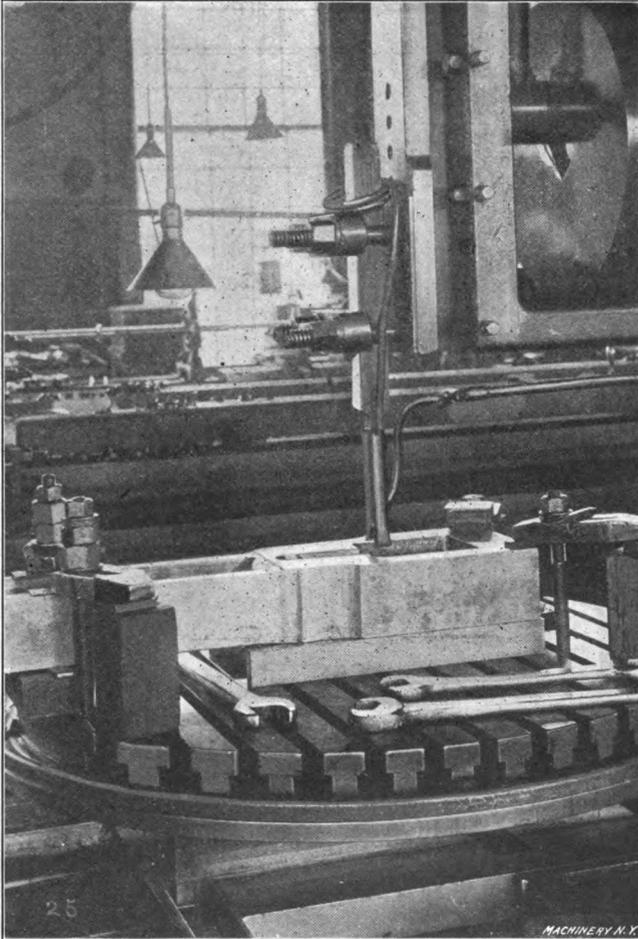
Working out the Opening at the Cross-head End of the Main Rod
